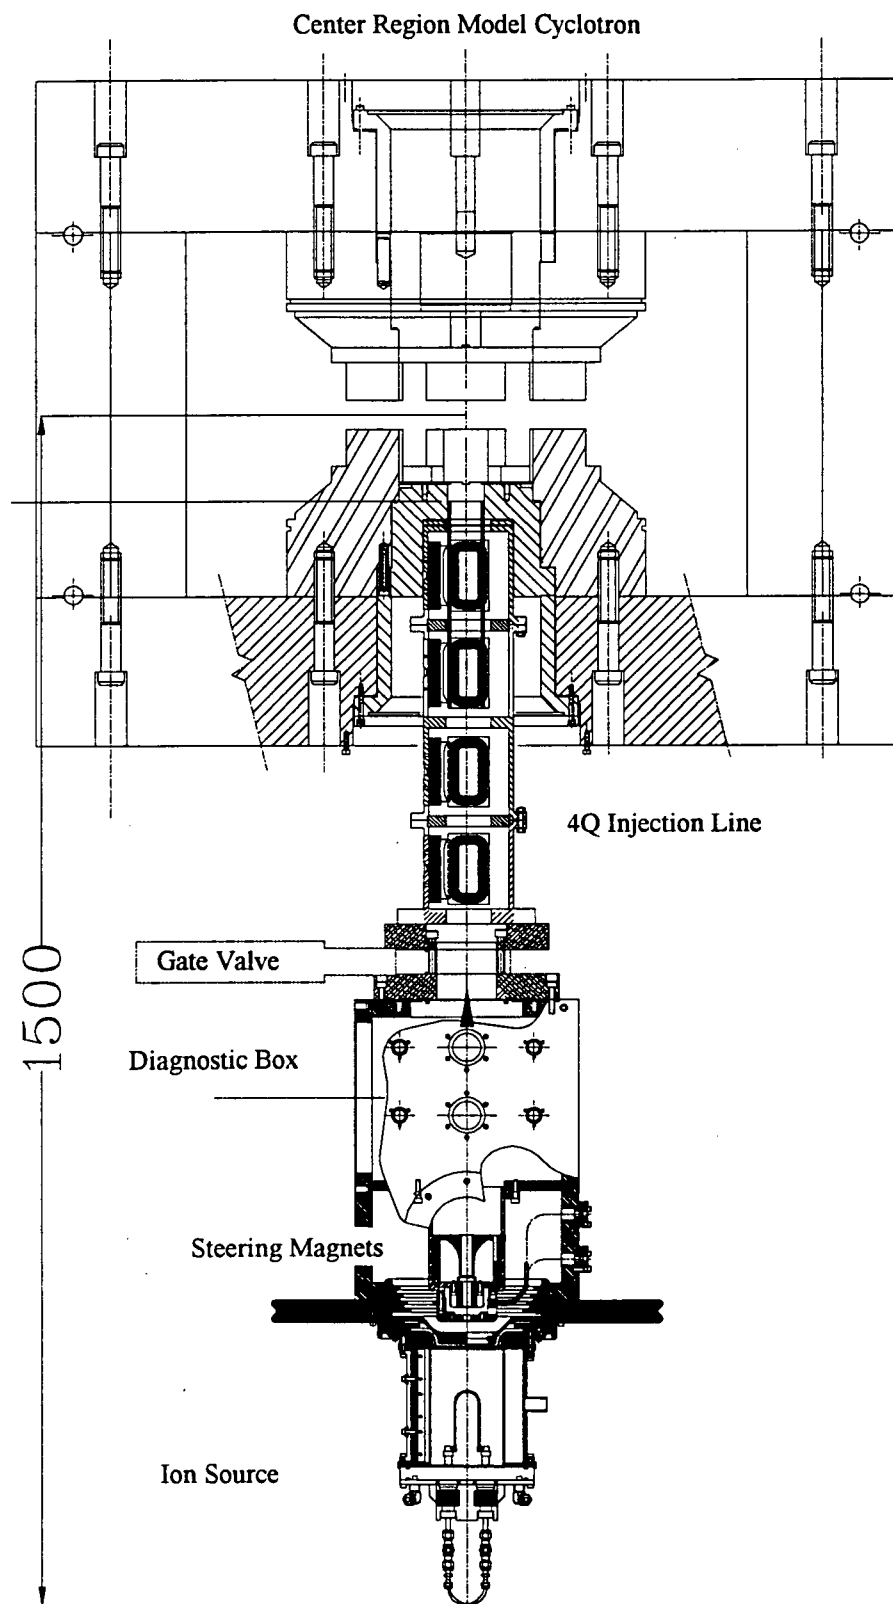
The 4Q injection line assembly drawing. Dimensions are in millimetres. Scale is $\approx 10:1$.
